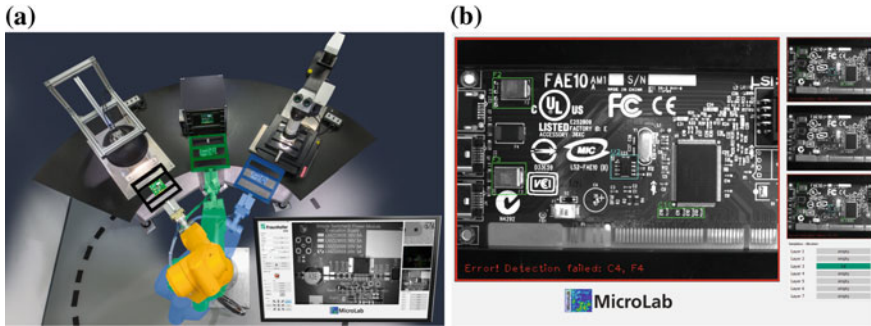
Illustration of the example setup with microscope, robot, industrial camera, caching magazine (a) and separate multiview display (b)
